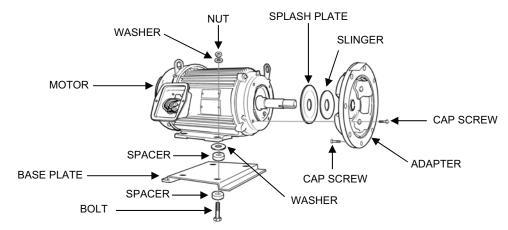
RO Feed Pump P4 Electric Motor Removal.
